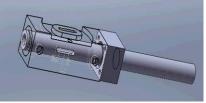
Rotary valve mechanism B. Exhaust Cam Shaft
